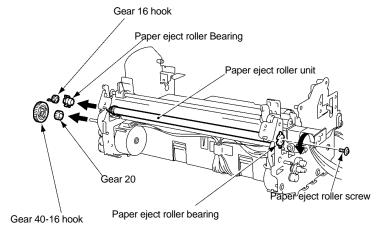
Removing the Paper Eject Roller Unit (1)
